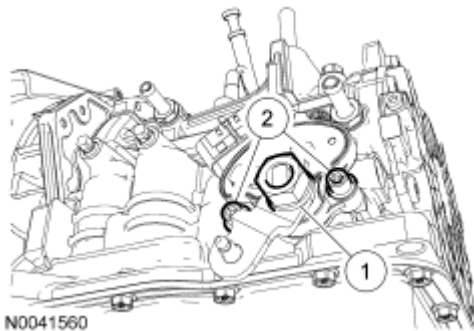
Identifying Manual Control Lever Nut And TR Sensor Bolt
